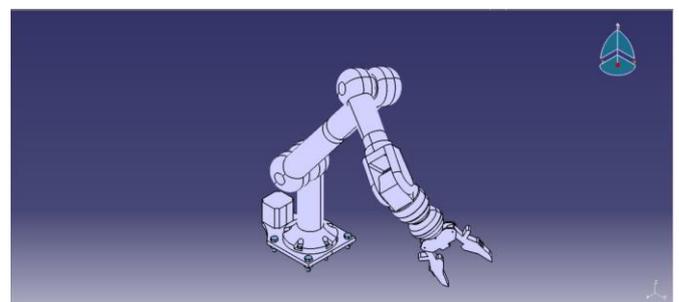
Design of 7 Axis Mechanical Arm in CATIA V5R21
